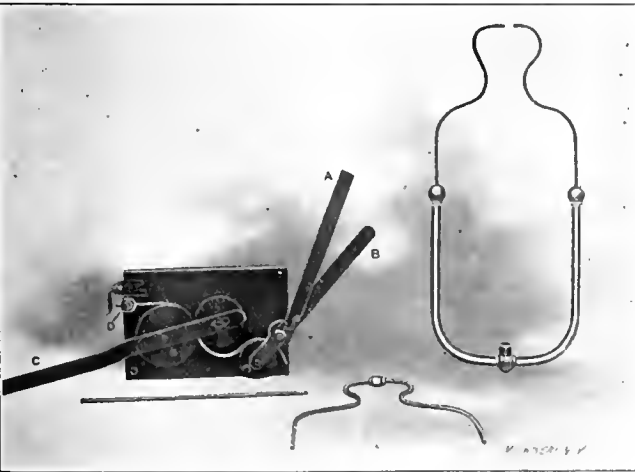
Tool of Simple Construction for Bending Brass Tubing
